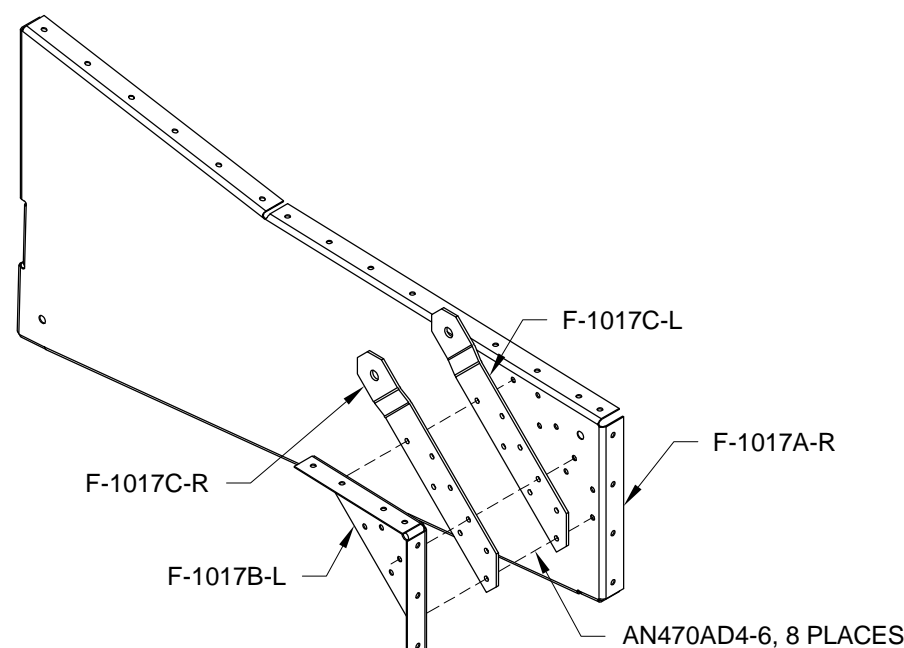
REAR SEAT RIB SUBASSEMBLY
